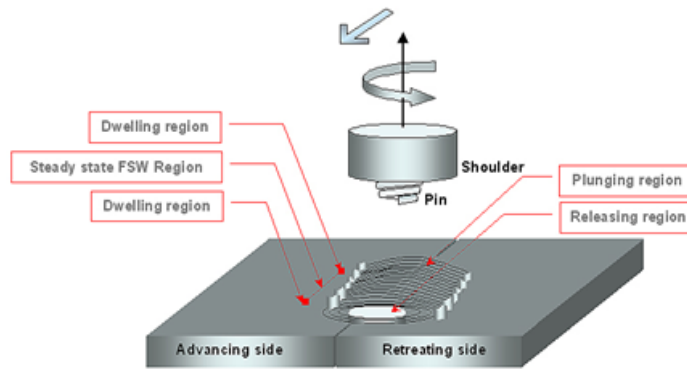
Schematic of Friction Stir Welding
